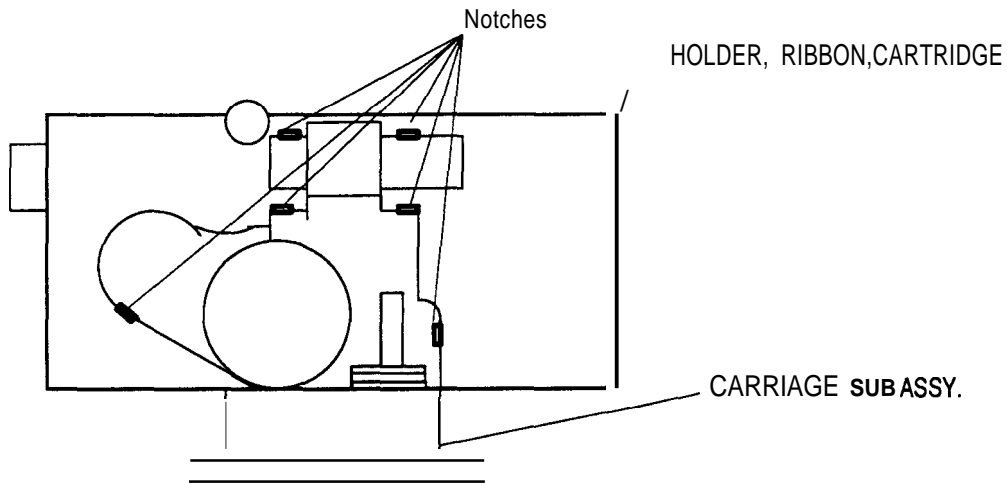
Bottom View of the CARRIAGE ASSY.
